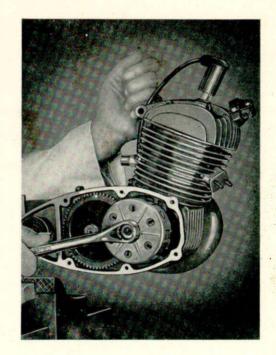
Removing the clutch thrust pin and thrust bearing.
